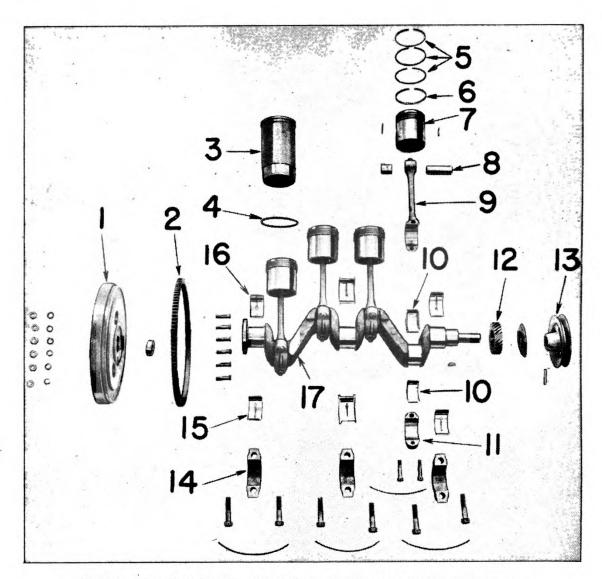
Detail of Engine Crankshaft, Connecting Rods and Pistons
